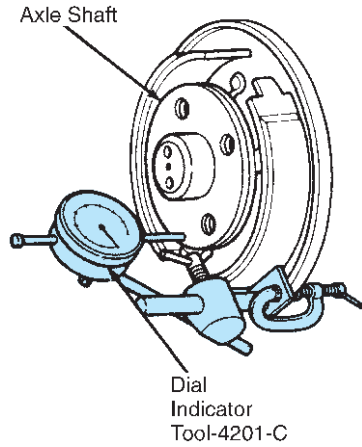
Axle shaft end play can be checked by mounting a dial indicator onto the brake assembly or axle housing with the indicator stylus on the axle. The indicator will measure the end play as the axle is moved in and out. (Courtesy of Ford Motor Company)
